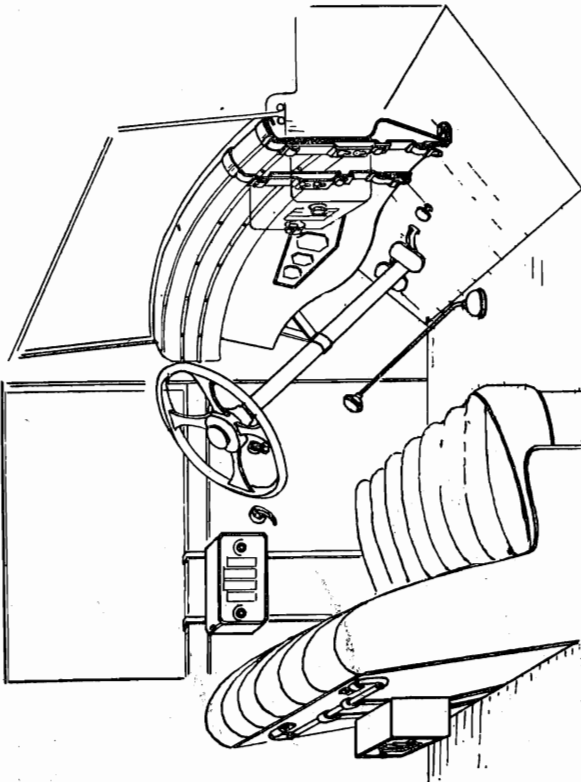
SKETCH SHOWING VARIOUS MOUNTING OF RECEIVER
